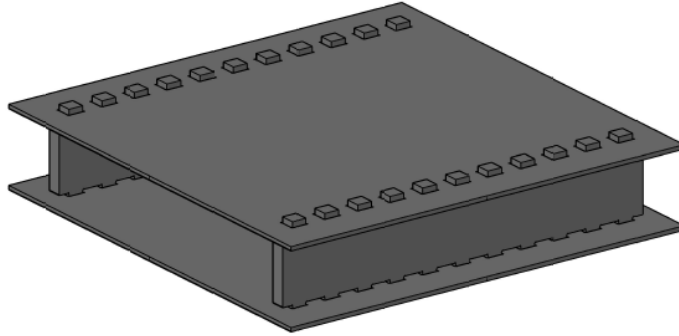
The mechanical support of the field winding designed in AutoCAD.
